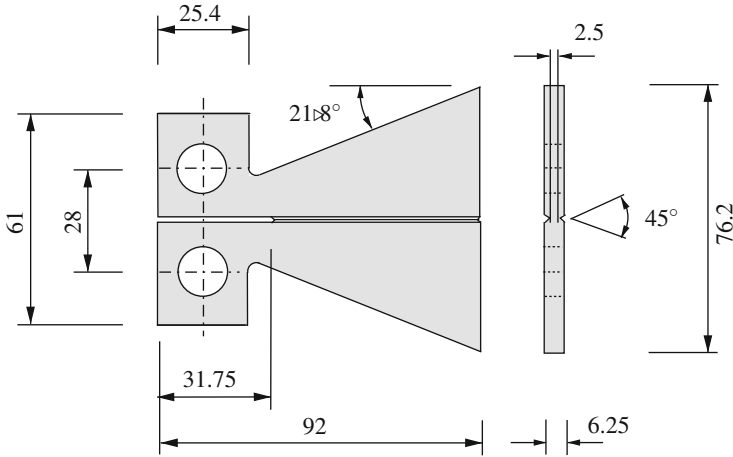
Geometry of the tapered double cantilever beam (TDCB) [9]; dimensions in millimeters
